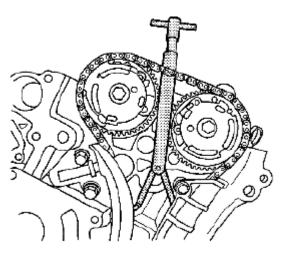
Identifying Special Tool EN-48313 Foot Courtesy of SUZUKI OF AMERICA CORP.
